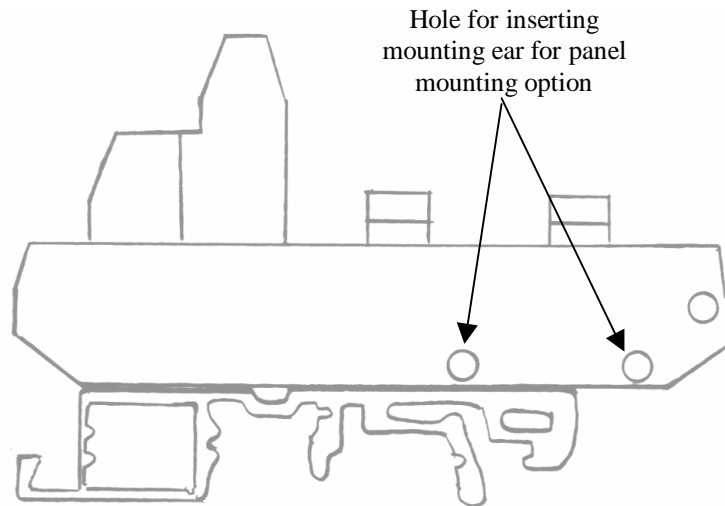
Terminal Board Assembly Side View (DIN-rail mounting foot installed)
